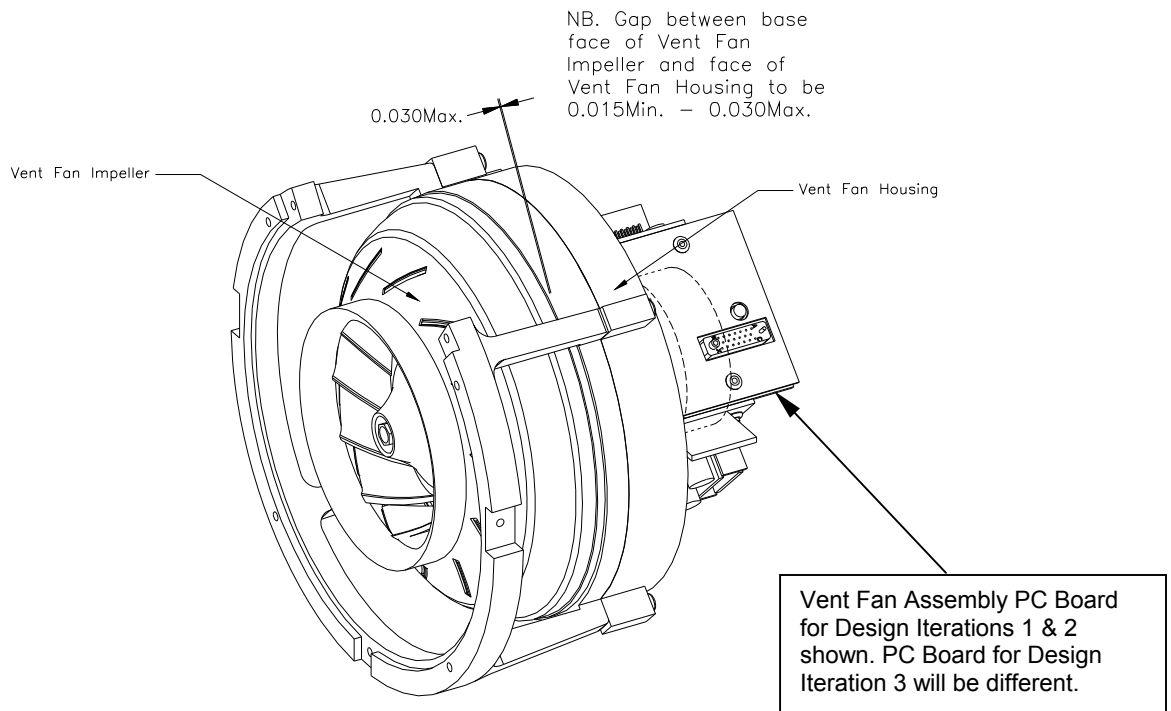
Detail, Vent Fan Impeller Assembly
